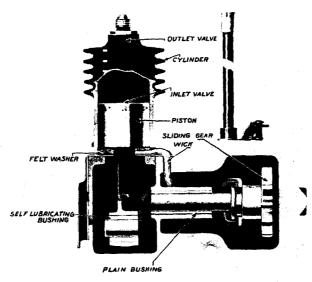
Kellogg Tire Air Compressor, Sectional View
